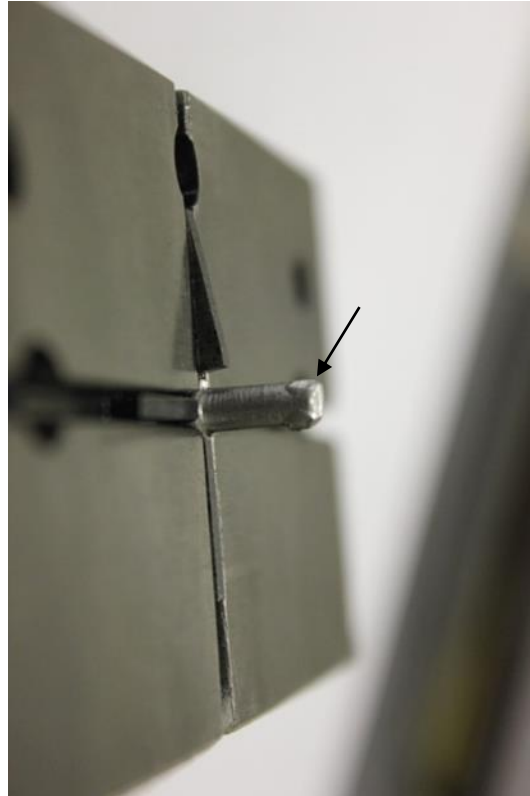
Pressed aluminum rod extending through pressing die face plate after continuous pressing
